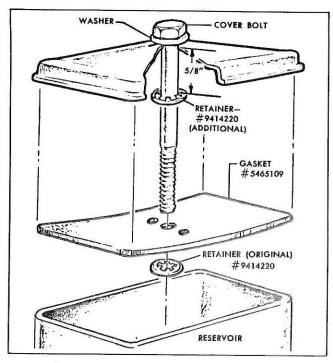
Rework of Brake Master Cylinder Cover Assembly
